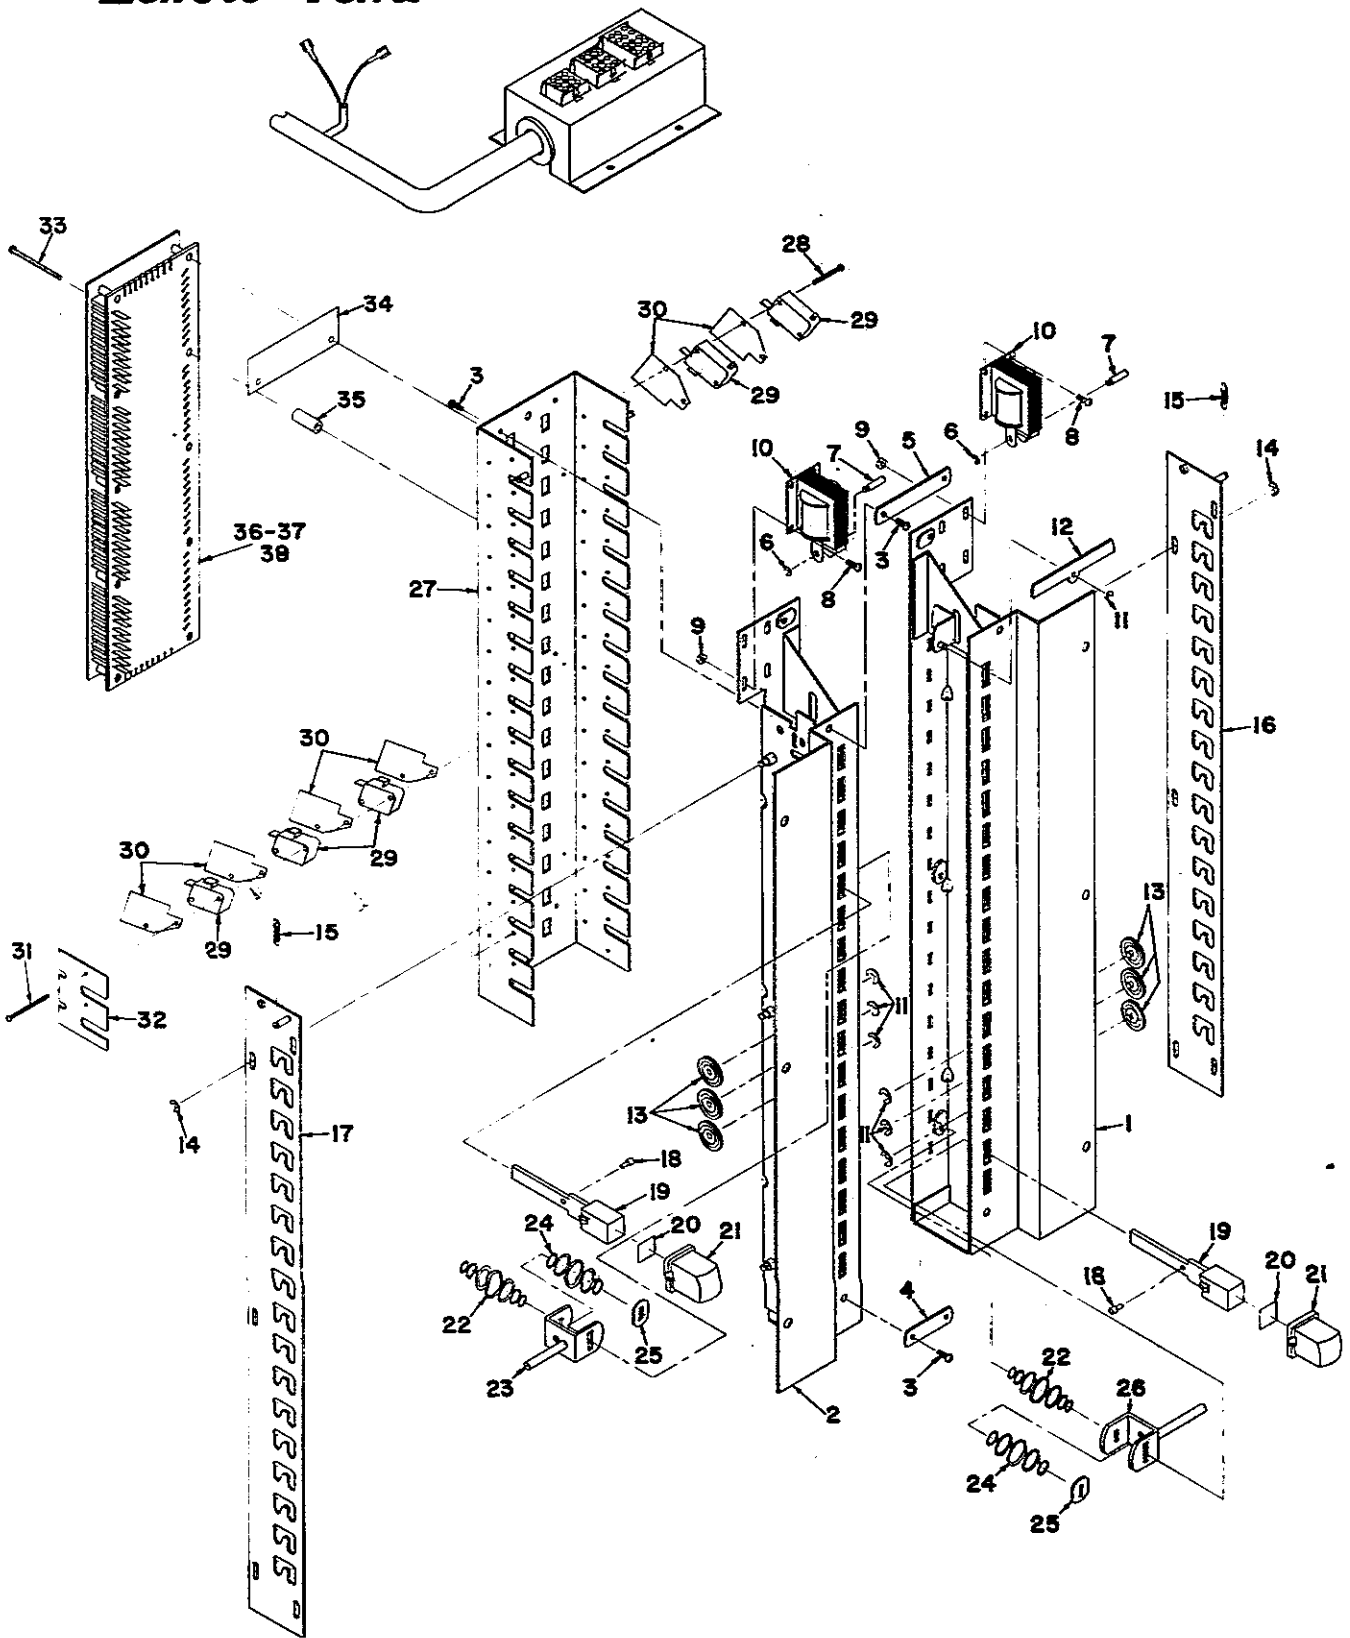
SELECTOR ASSEMBLY -- ALL MODELS
